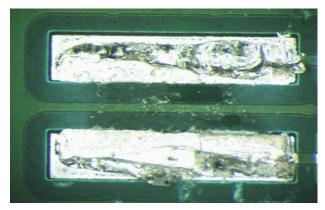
The reverse geometry chip and line under component on the assembly with solder mask.
